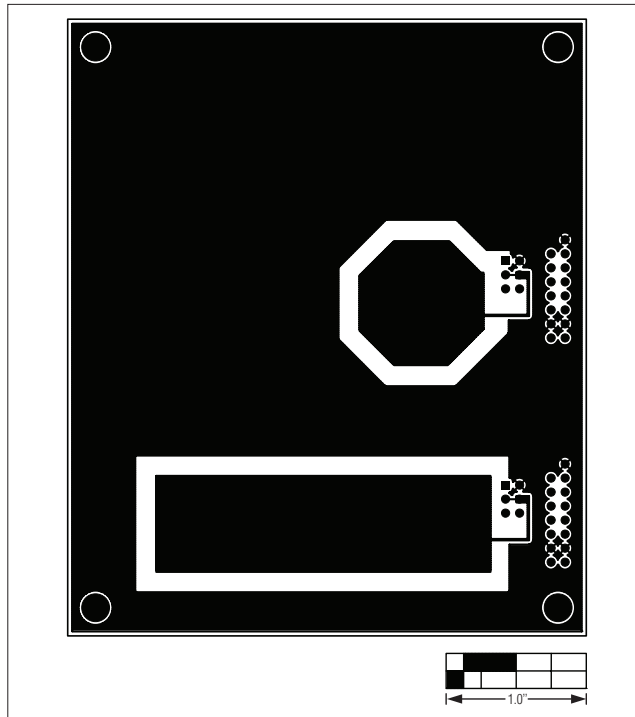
MAX1441TP EV Kit PCB Layout—Solder Side
